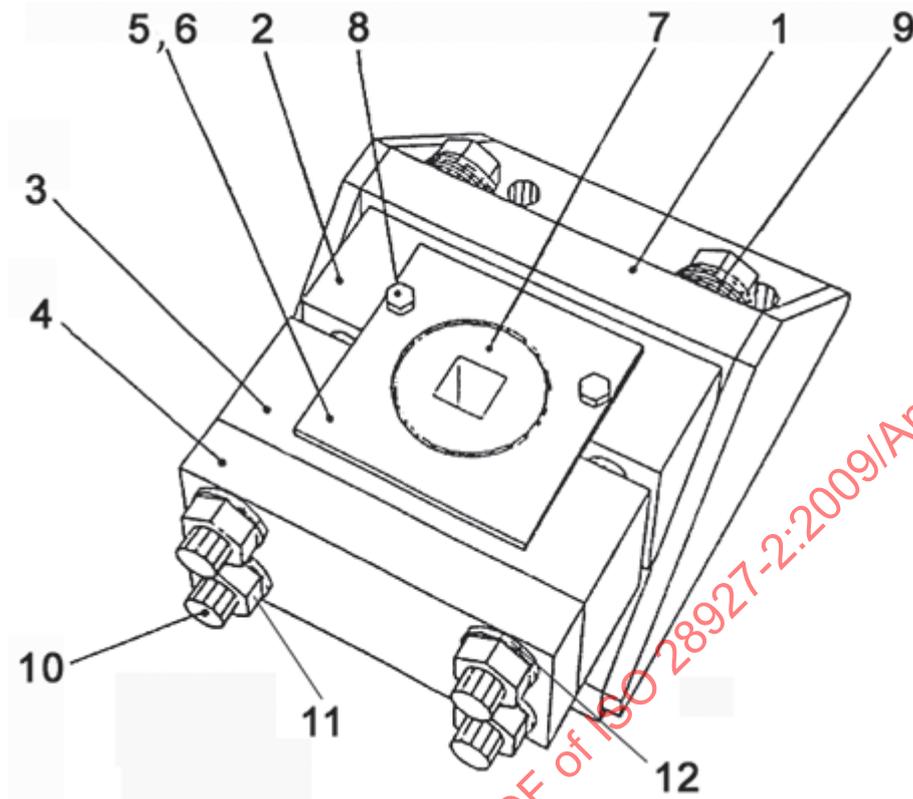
Brake device, large — For machines with shaft sizes 20 mm, 25 mm and 40 mm
